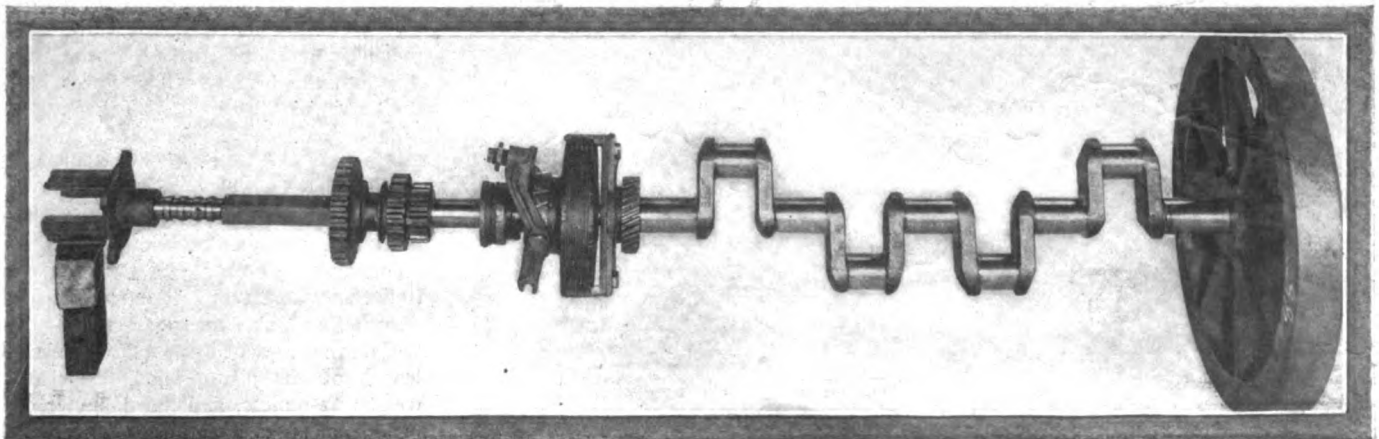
Showing the assembly of the flywheel, crankshaft, clutch, primary shaft of the transmission, sliding gears and universal joint
